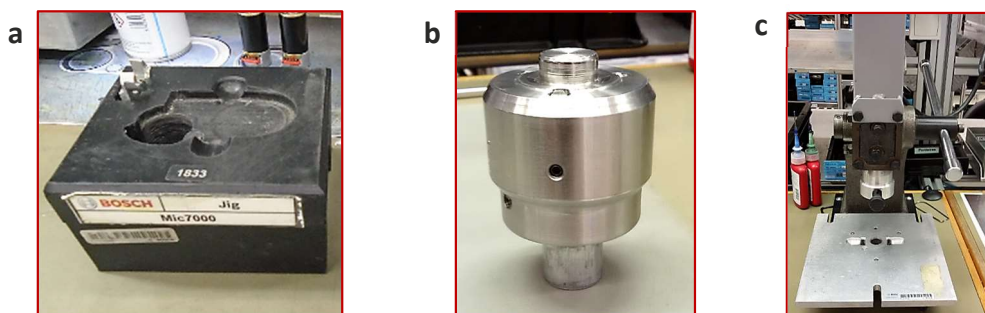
a) The assembly fixture; b) The adaptor for press fit the bearing; c) the manual Arbor.
